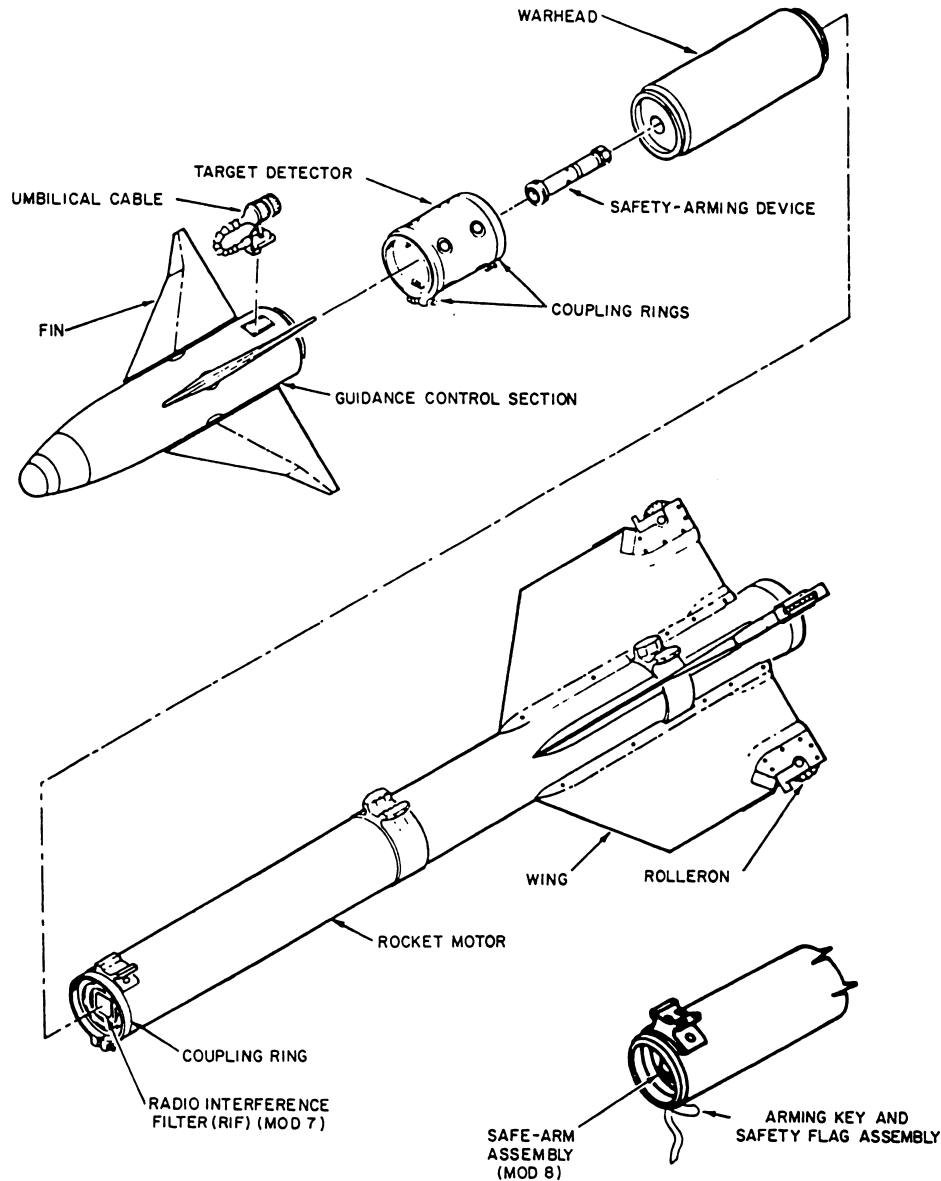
AIM-9L and ATM-9L-1 Sidewinder guided missile (exploded view).
